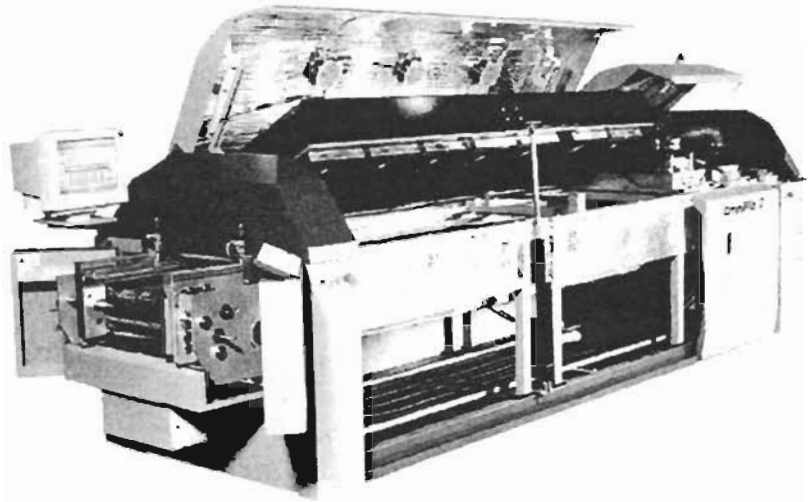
Exploded view of an infra-red SC soldering machine. (Speedline Electrovert)
